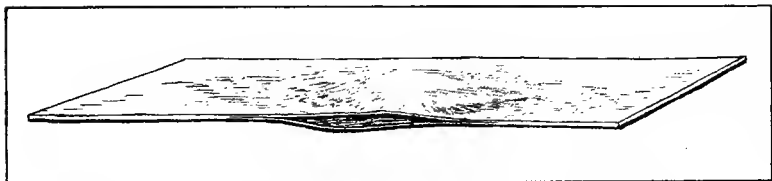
Piece of flat steel containing pipe; after hardening.
